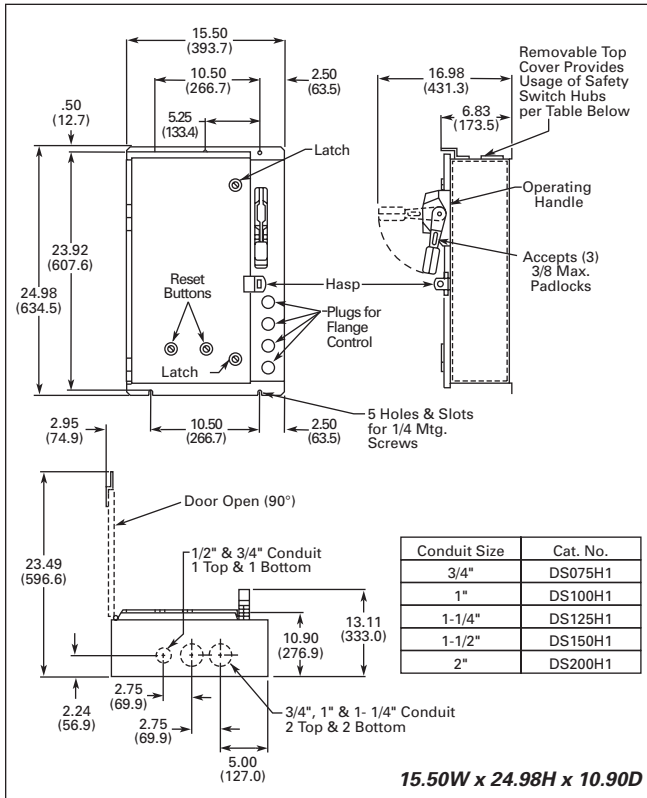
Box B1, Type 3R — Approximate Dimensions in Inches (mm)
